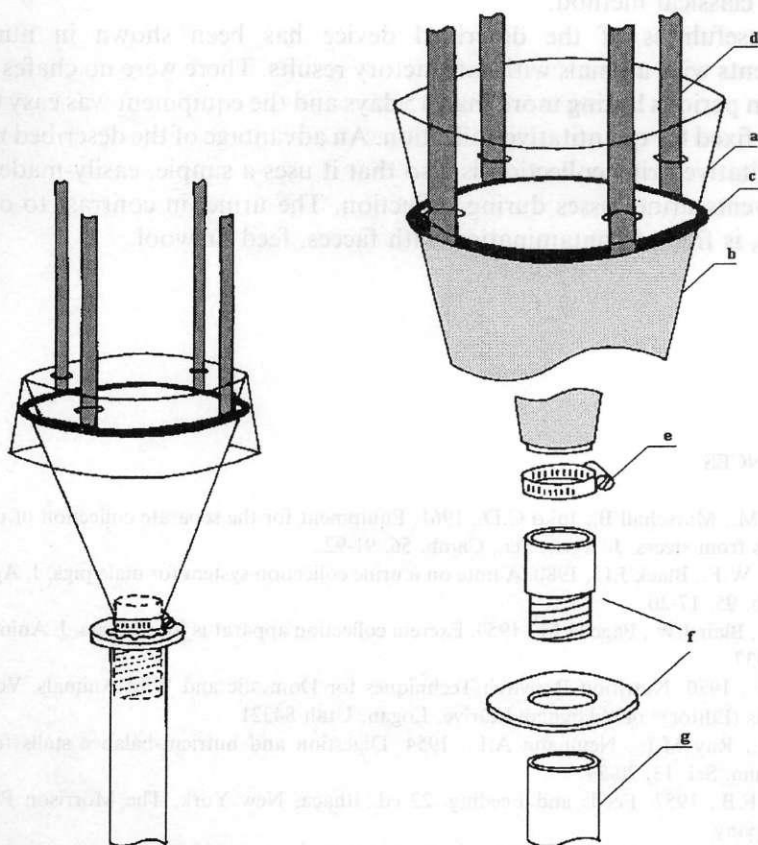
Device construction: a – internal thin plastic foil sleeve; b – external protective sleeve; c – plastic ring; d – tapes fixing device; e – clamp; f – connector; g – flexible plastic tube
